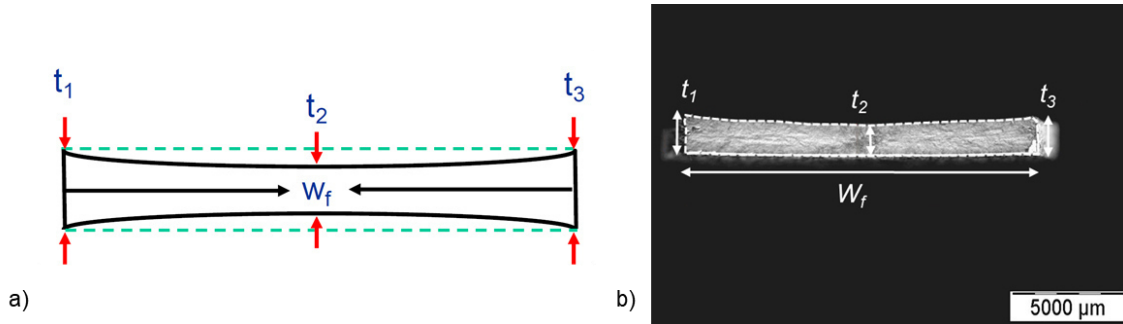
a) Schematic representation of the parabolic fracture surface profile of a uniaxial tensile specimen with rectangular cross-section [52]. b) Fracture surface of a flat sheet tensile specimen. Microscope image.
